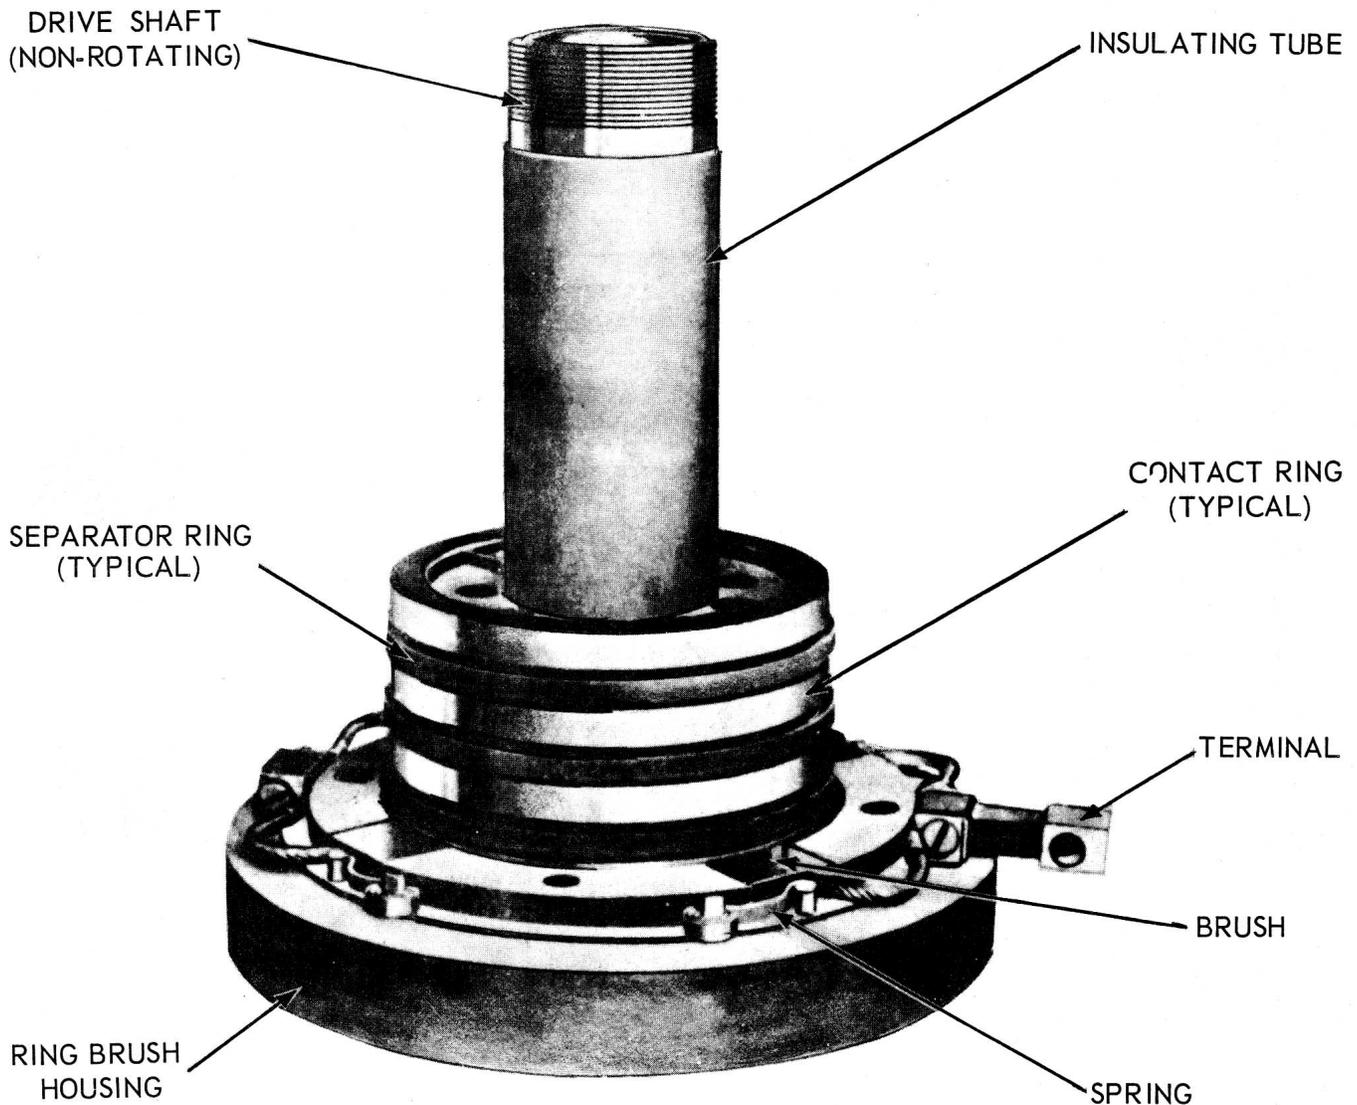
Partially disassembled 400-volt collector ring assembly (Mk 7 Mod 1 launcher).
